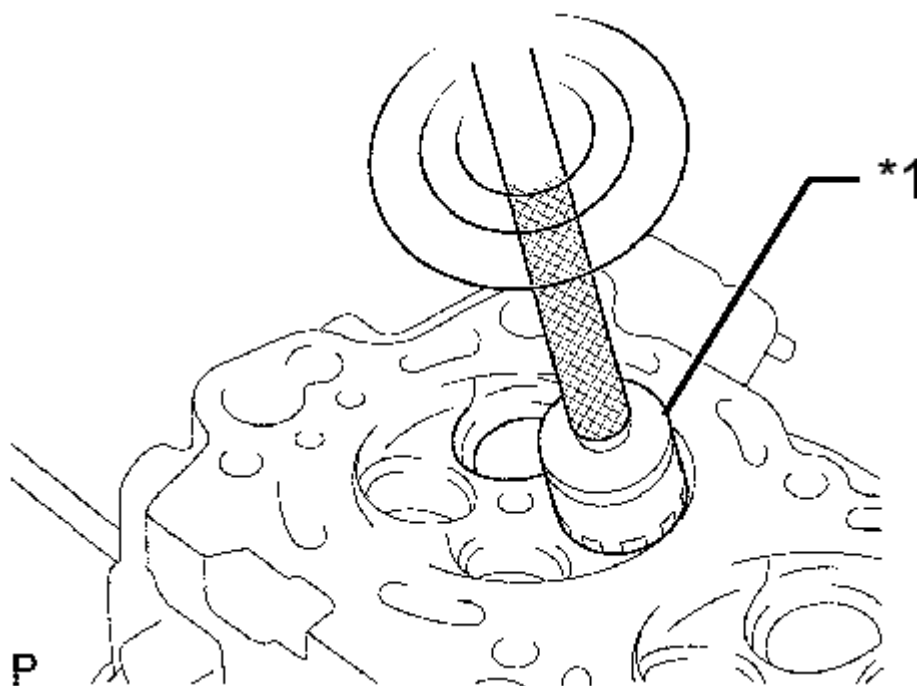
Cleaning Valve Seat Using 45° Carbon Cutter
